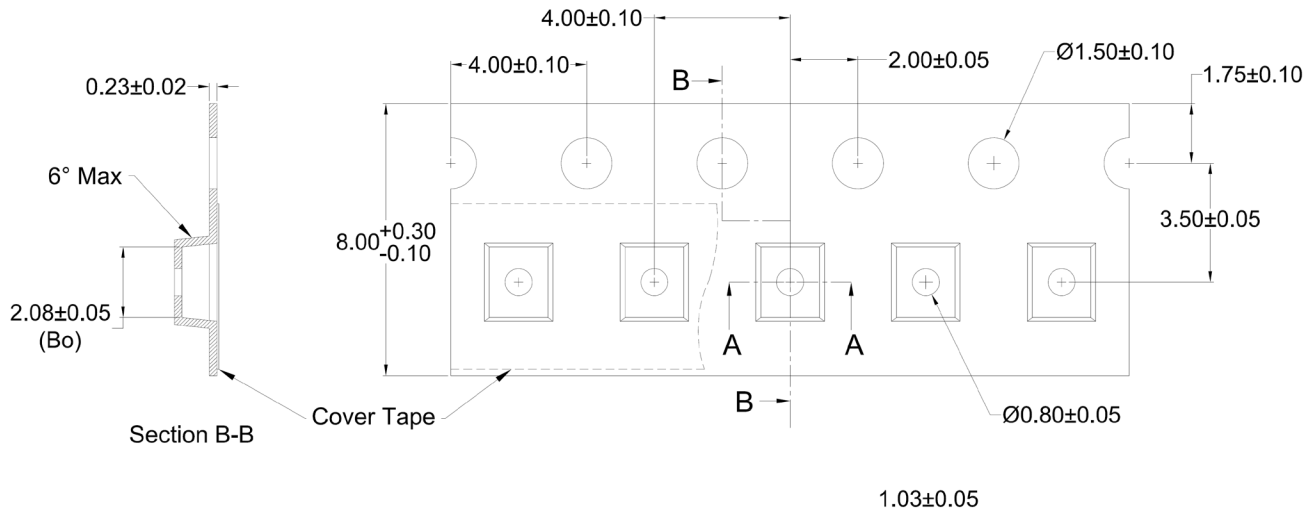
Pocket tape dimensions for LUXEON FX2 PC Amber
